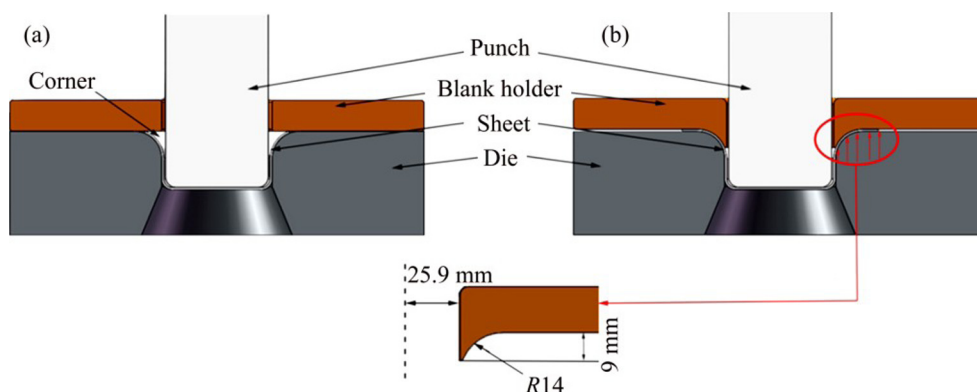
Schematic of apparatus for deep drawing: (a) Flat blank holder; (b) Curved blank holder
